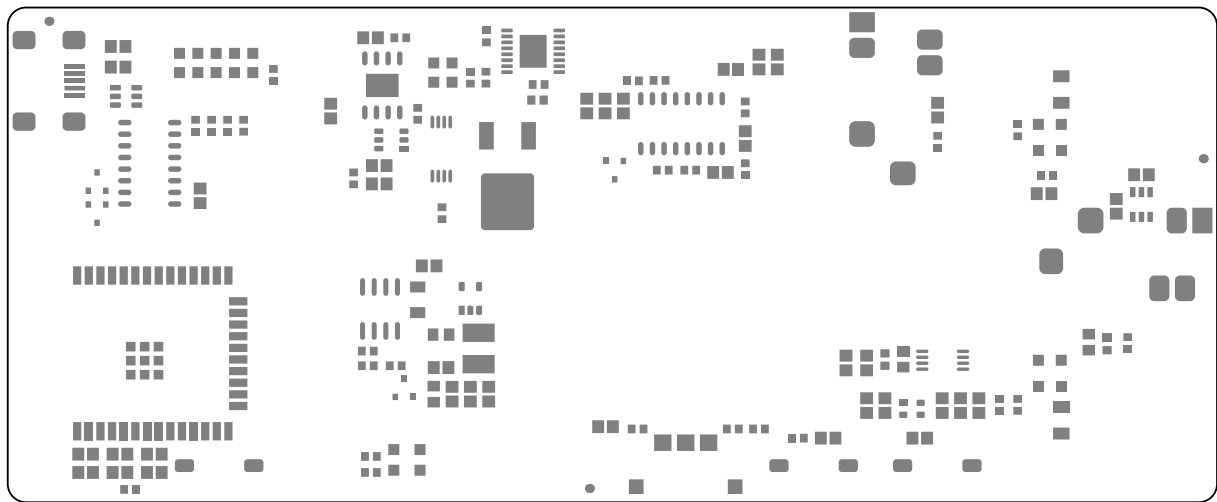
Representation of the Gerber Top Solder (*GTS*), which is a mask of the SMD pads in top layer.
